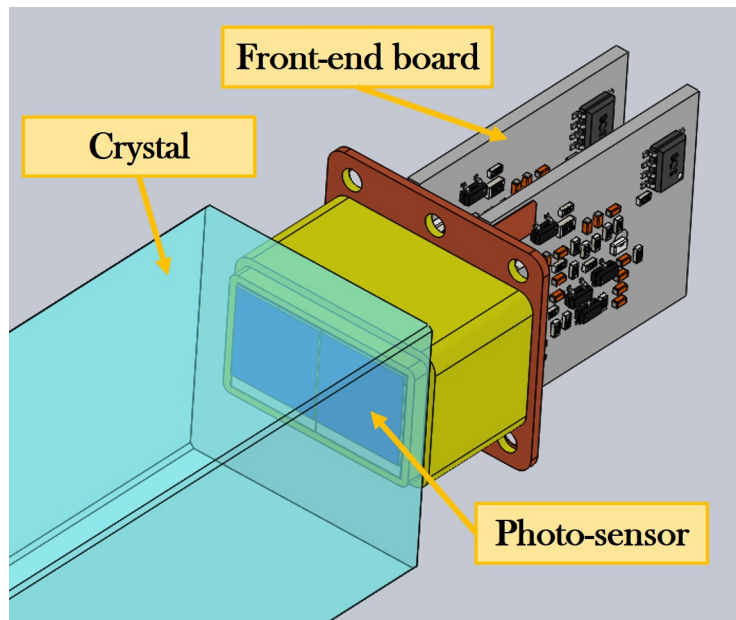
CAD model of one crystal, photo-sensor and front-end board.
